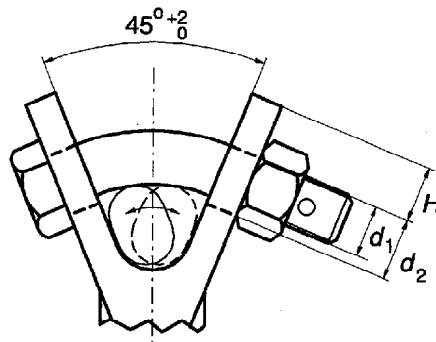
Dimensions of Y-clevis couplings and gauges
